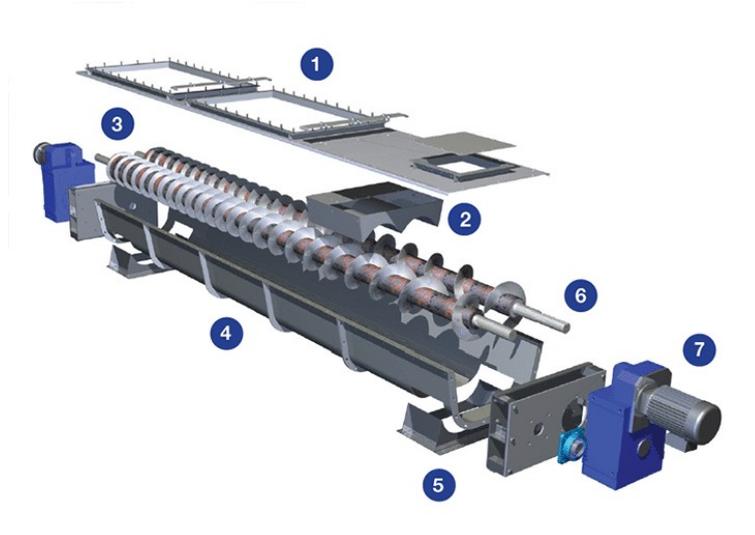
Regular screw feeder (KWS Manufacturing Company. p. 9)
